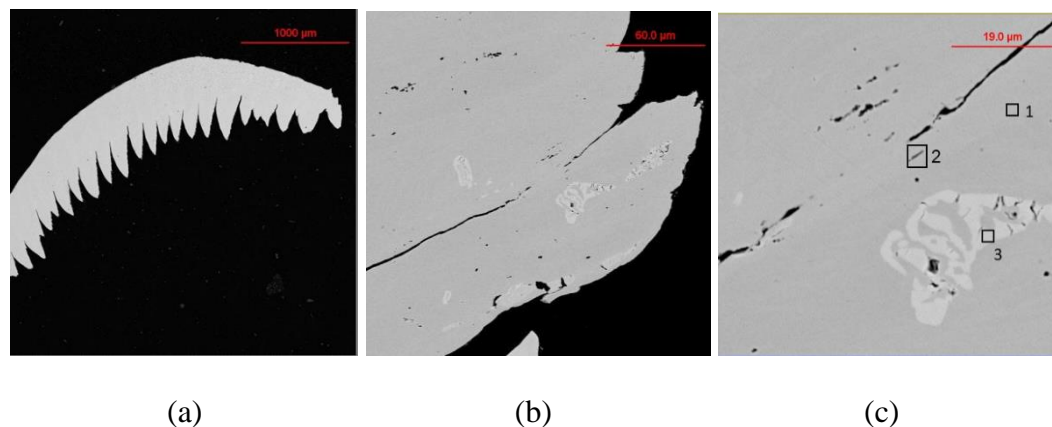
SEM image of a representative machine chip collected during machining (a) (both steels had serrated chips present in machining), (b) and (c) are higher magnification SEM images of a machine chip showing fractured σ -phase and TiN inclusions. The EDX results of the points in (c) can be seen in the table below.
